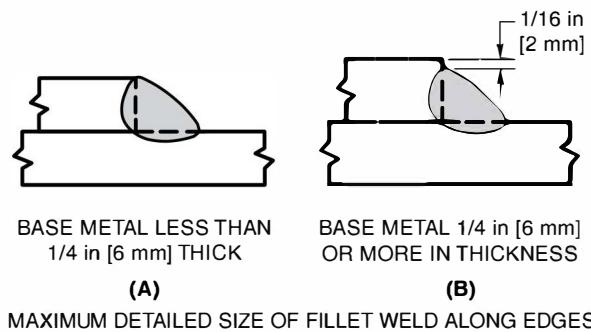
Maximum Fillet Weld Size Along Edges in Lap Joints (see 4.4.2.9)
